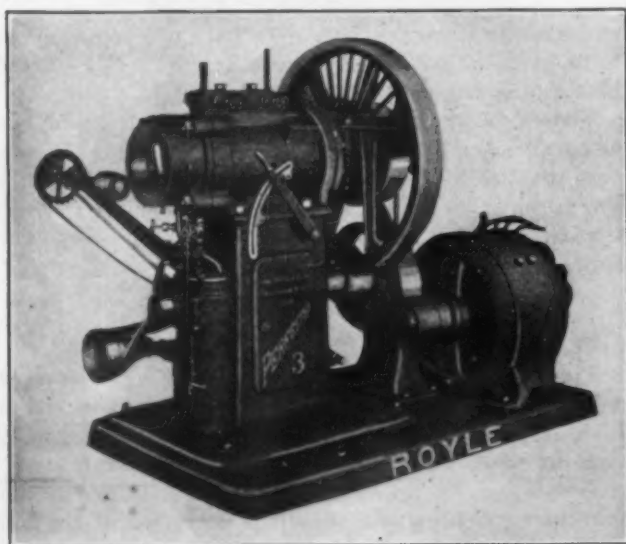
TUBE MACHINE, SIZE SUITABLE FOR CARRIAGE TIRES
